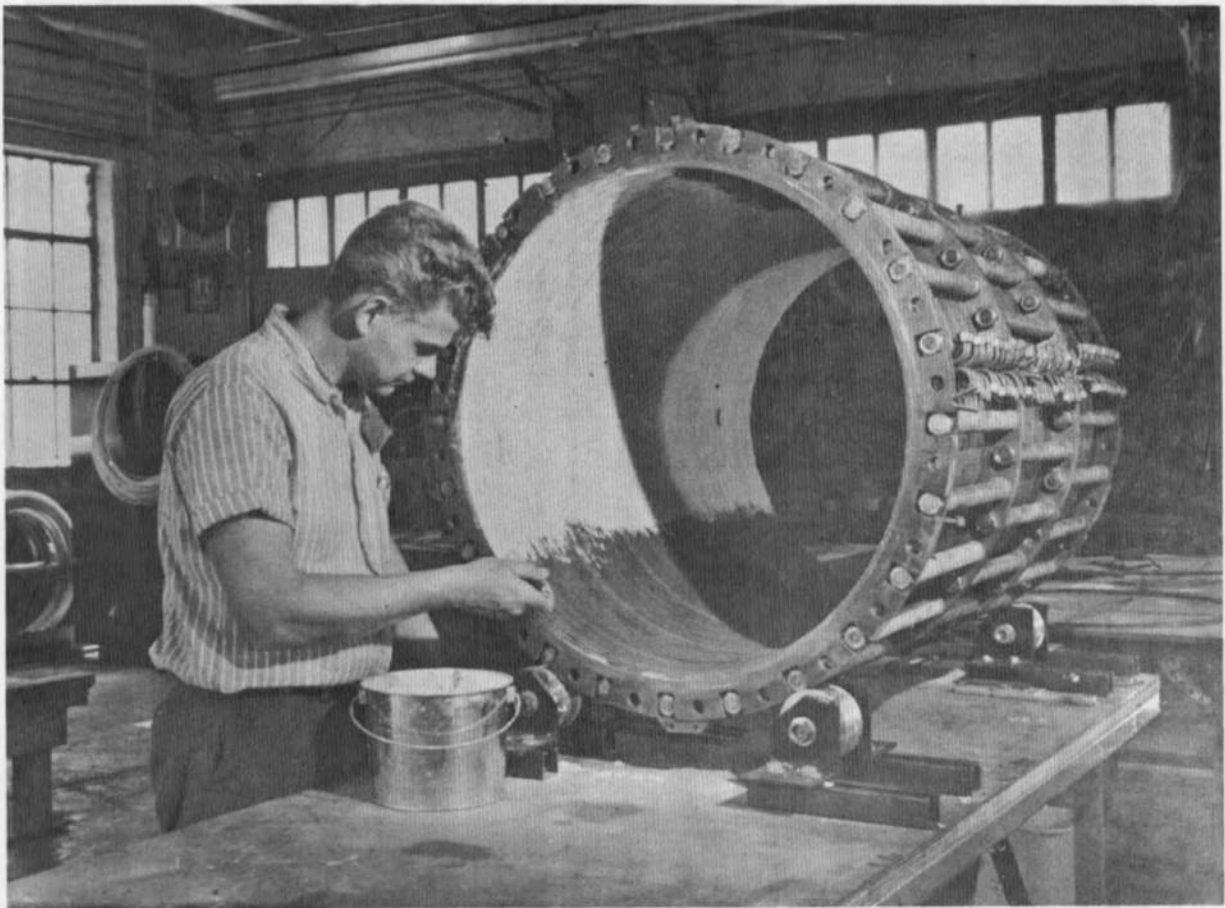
Assembled MHD Generator Channel Major Section of Ninety (90) Rings
